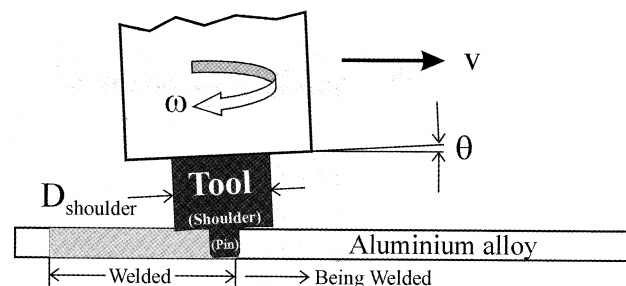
Schematic illustrating friction stir welding and the controlling parameters.
